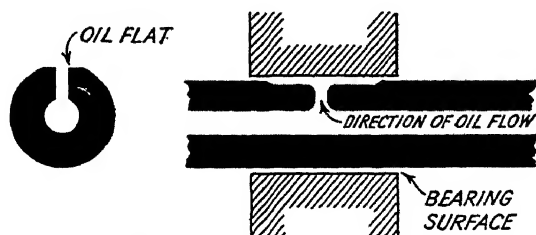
Sections through a shaft and bearing, showing an oil flat and oil passages.
